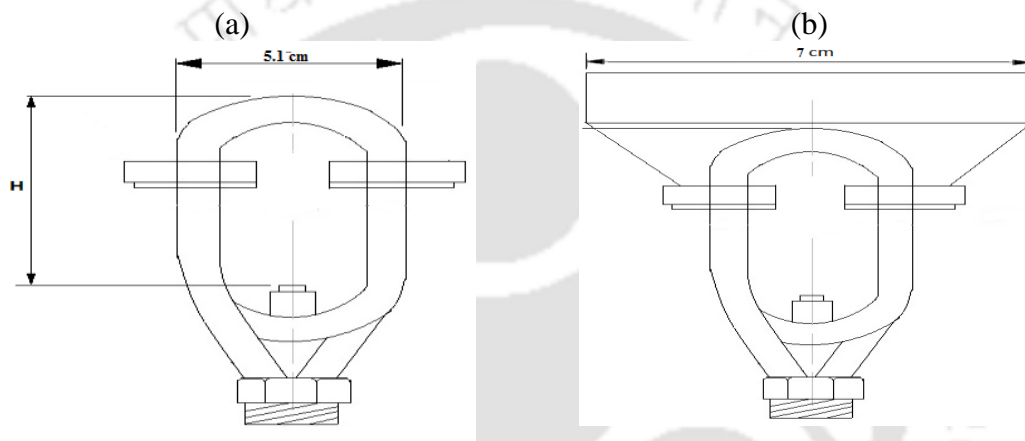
Schematic of the newly designed burner: (a) without burner casing ($H= 4.5$ cm) (b) with burner casing.
